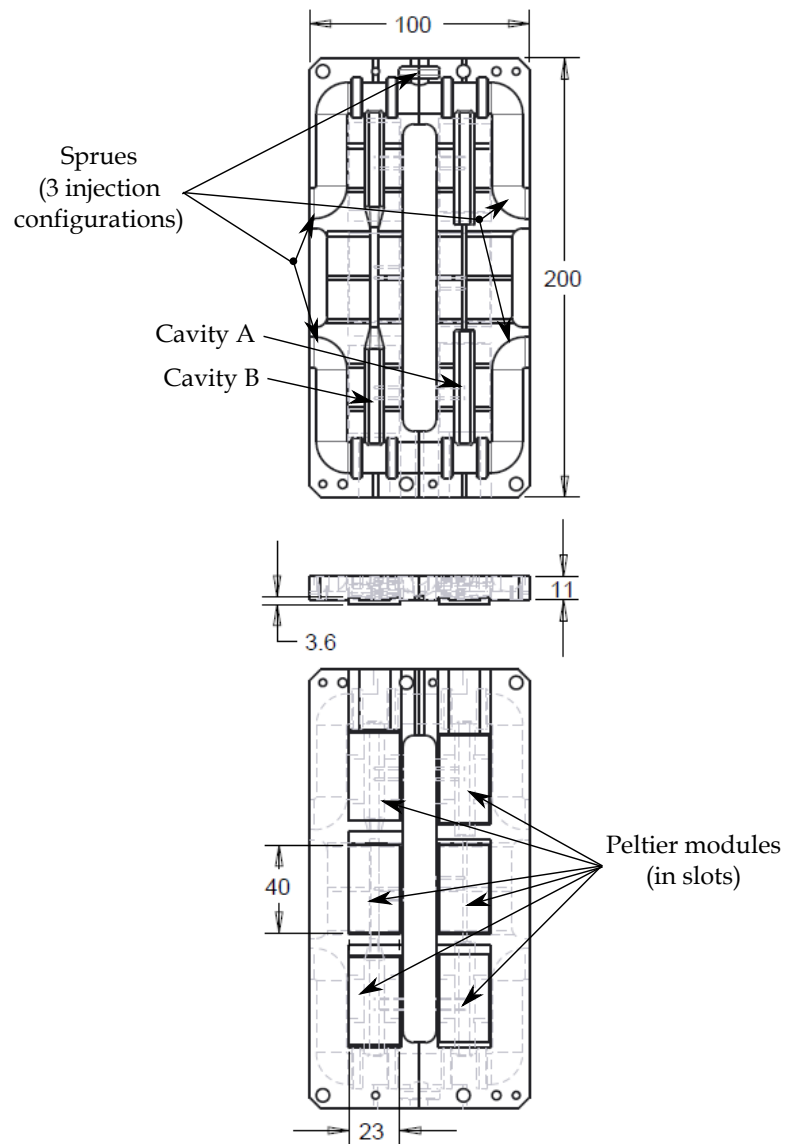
Regional controlled mould (industrial): main dimensions of mould and Peltier modules.
